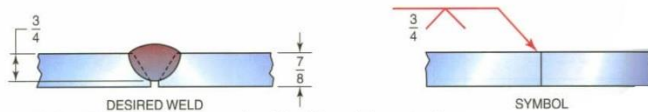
Designating the size of grooved welds with partial penetration.
